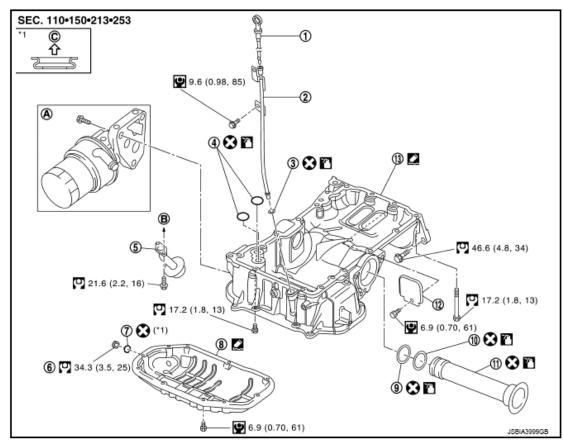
Exploded View Of Lower Oil Pan With Torque Specifications (2WD) Courtesy of NISSAN NORTH AMERICA, INC.
